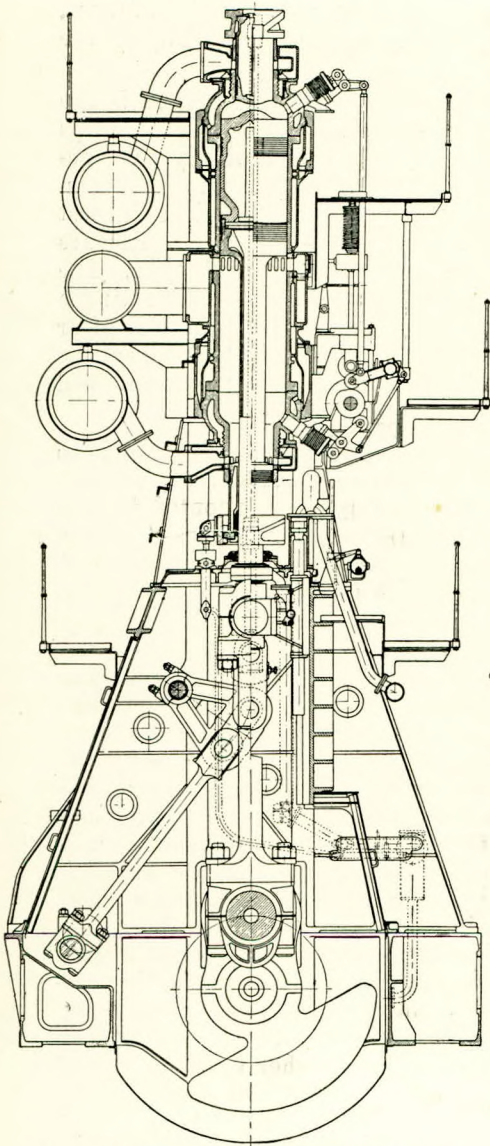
B. & W. Two-Stroke Cycle Double-Acting Marine Diesel Engine.
